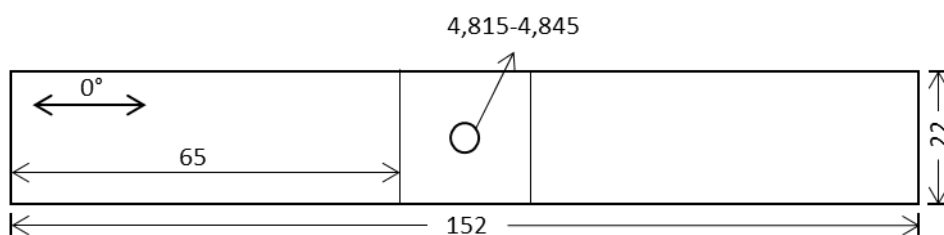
Coupon geometry for open hole compression test, according to AITM 1-0008. All dimensions are expressed in mm.
